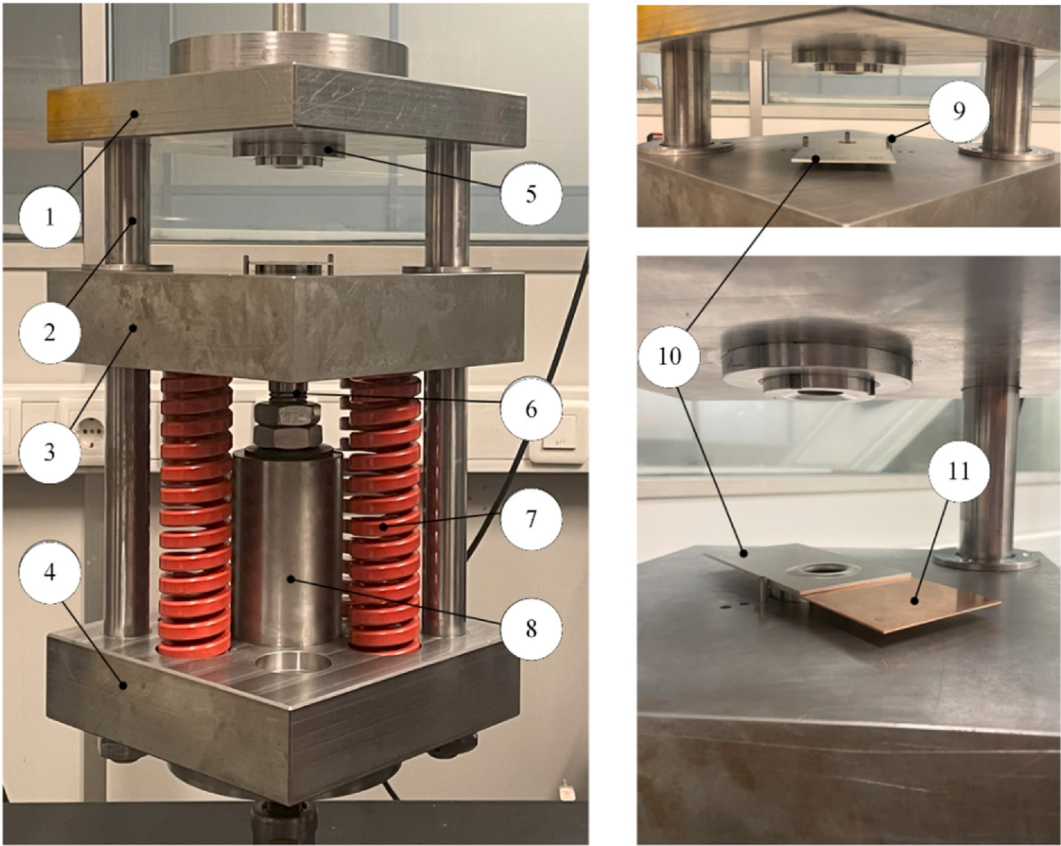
Hole hemming tool components and metallic sheets: 1 - upper plate, 2 - guide pillars, 3 - middle plate, 4 - lower plate, 5 - die holder, 6 - punch holder, 7 - springs, 8 - height adjuster, 9 - pins, 10 - outer sheet (AA6082-T4 aluminium), and 11 - inner sheet (Cu-ETP R240 copper).
